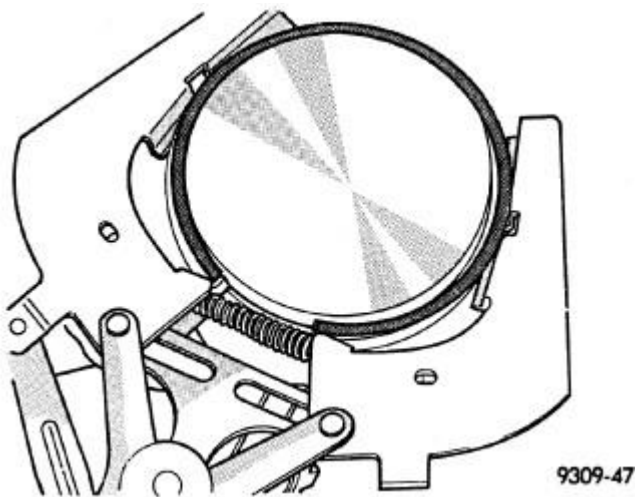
Upper and Intermediate Rings - Removal & Installation
